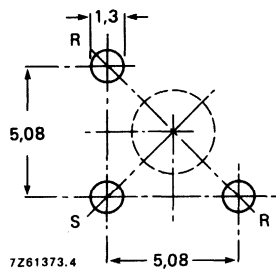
Hole pattern; R=rotor, S=stator. The large hole is for bottom adjustment; the diameter is determined by user's requirements.
